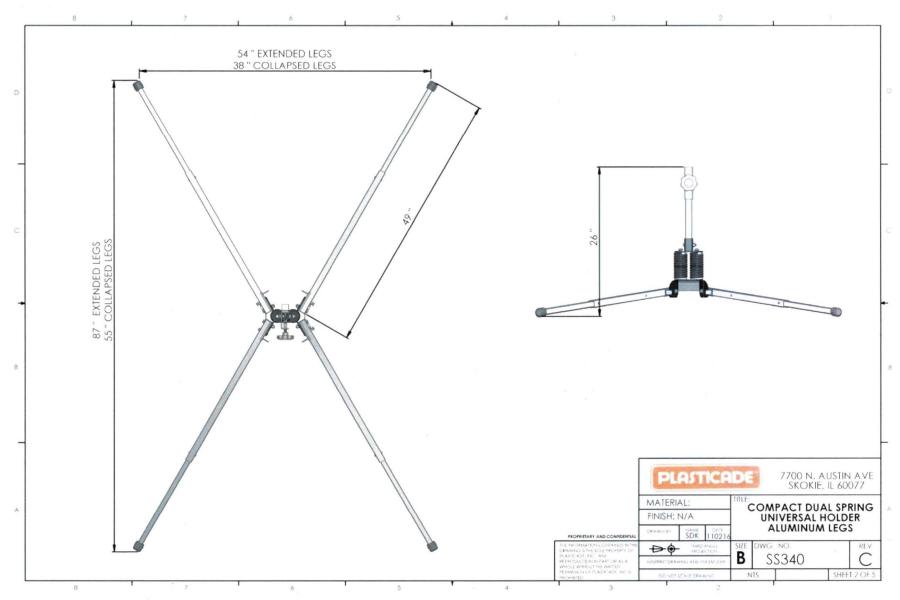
Plasticade® SS340 Technical Drawing (Sheet 2 of 5)
